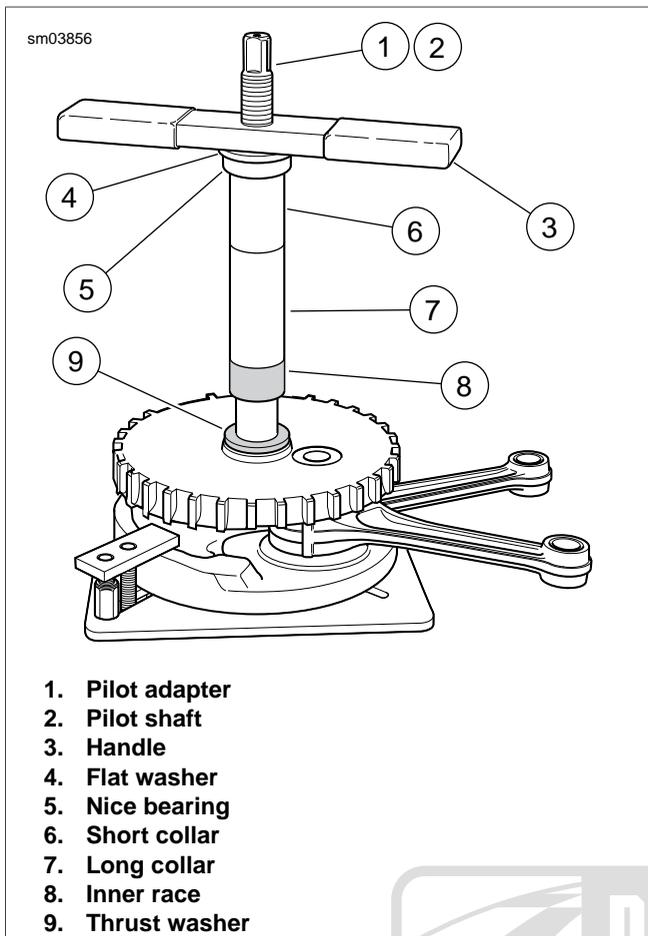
Press Inner Race onto Sprocket Shaft: Setup
